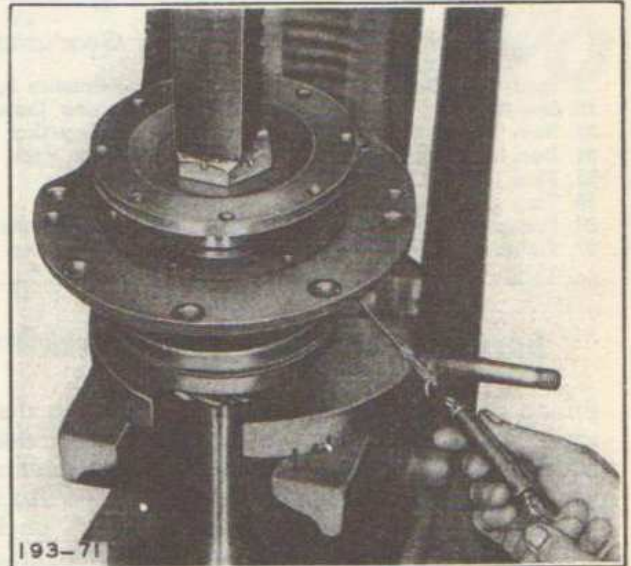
Testing Bevel Pinion Bearing Adjustment
